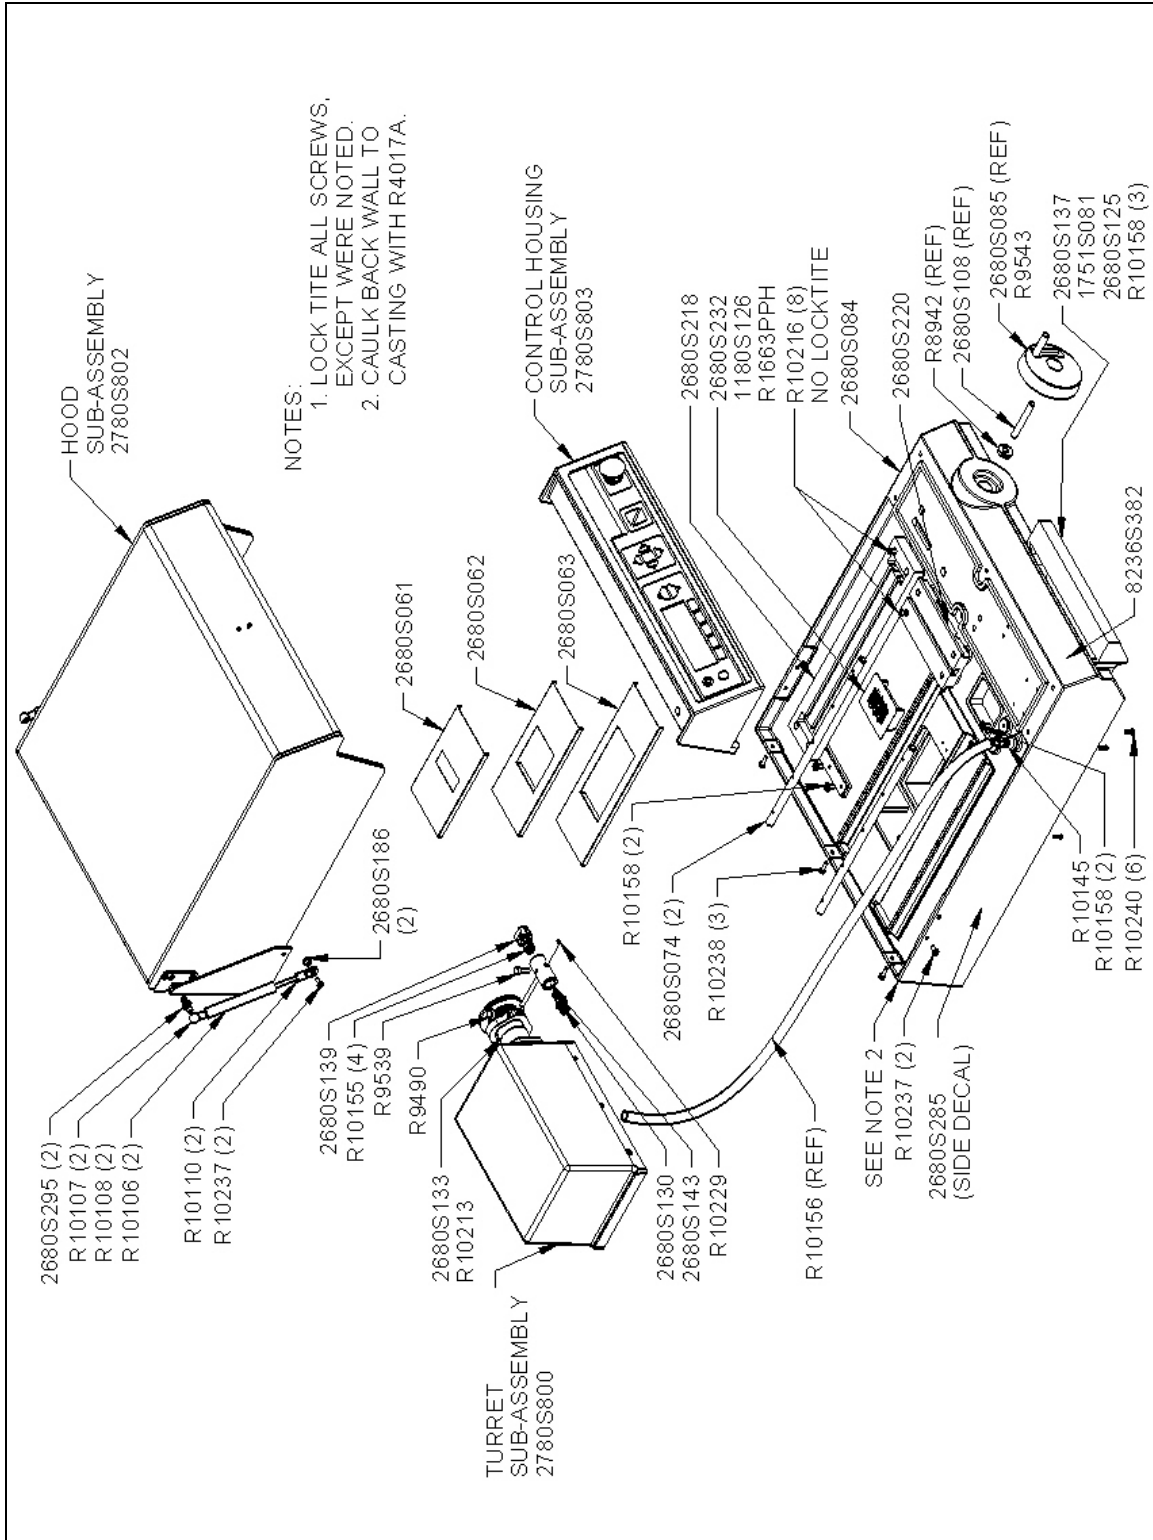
IsoMet 5000 Top View of Assembly Diagram (2780900B)
